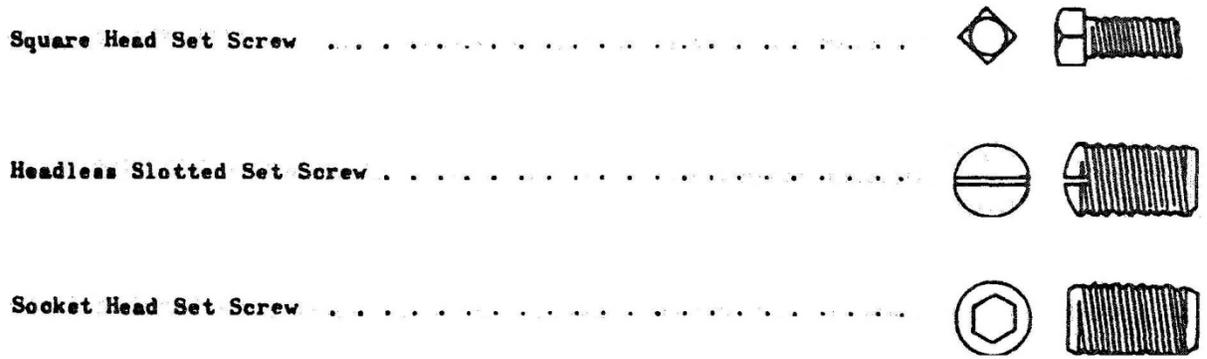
Fastener Head Styles: Set Screw Heads (Sheet 3 of 3)
